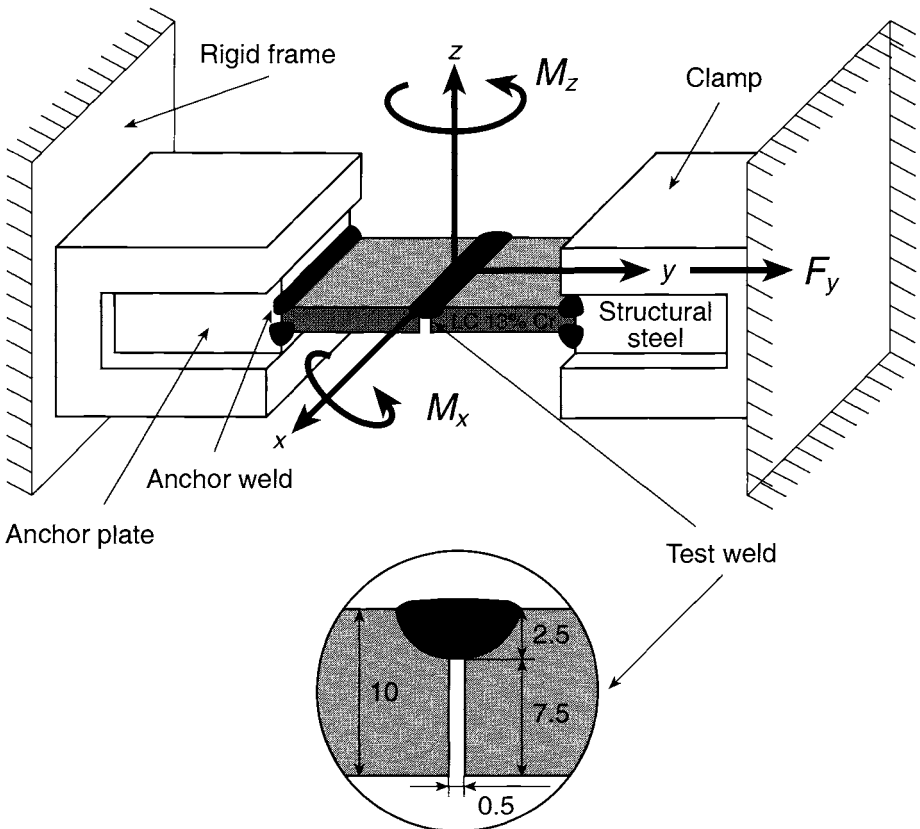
Schematic illustration of the IRC test setup for DIC welding of pipeline segments.
